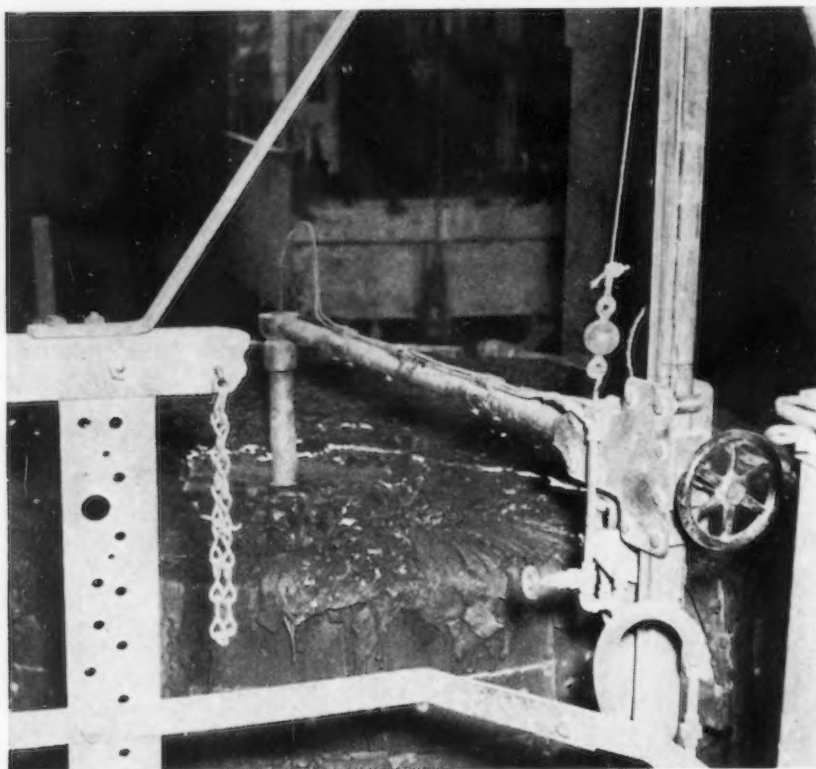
Ladle type of C-SiC thermocouple. This couple, as used on this 40-ton ladle, is inserted to a depth of 20 in. below the surface of the slag. Photo by Swank.
